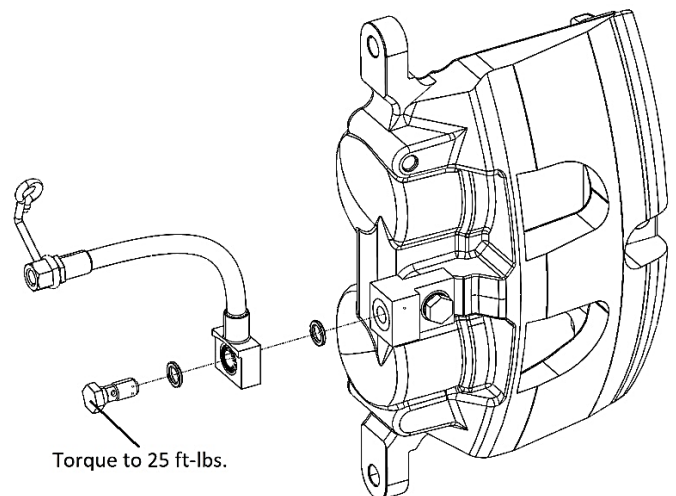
Installation of Passenger Side OEM Brake Line to Relocation Block
